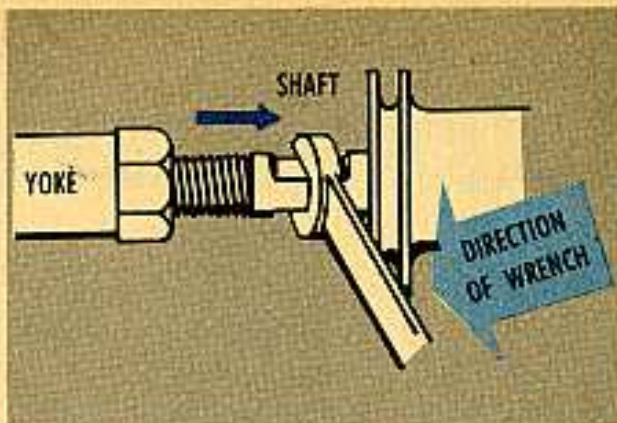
If lever doesn't move (and adjustment still isn't OK), back off lock nut and turn shaft out of yoke to lengthen link.
